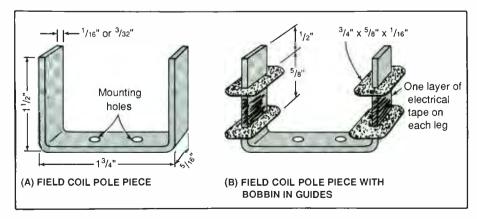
Machining details for field-coil piece (A) and optional bobbin guides (B).
